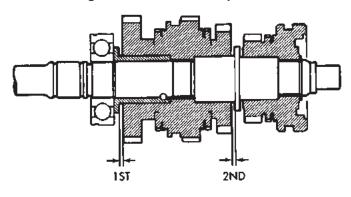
Install First Gear Bearing Inner Race Lock Ball
